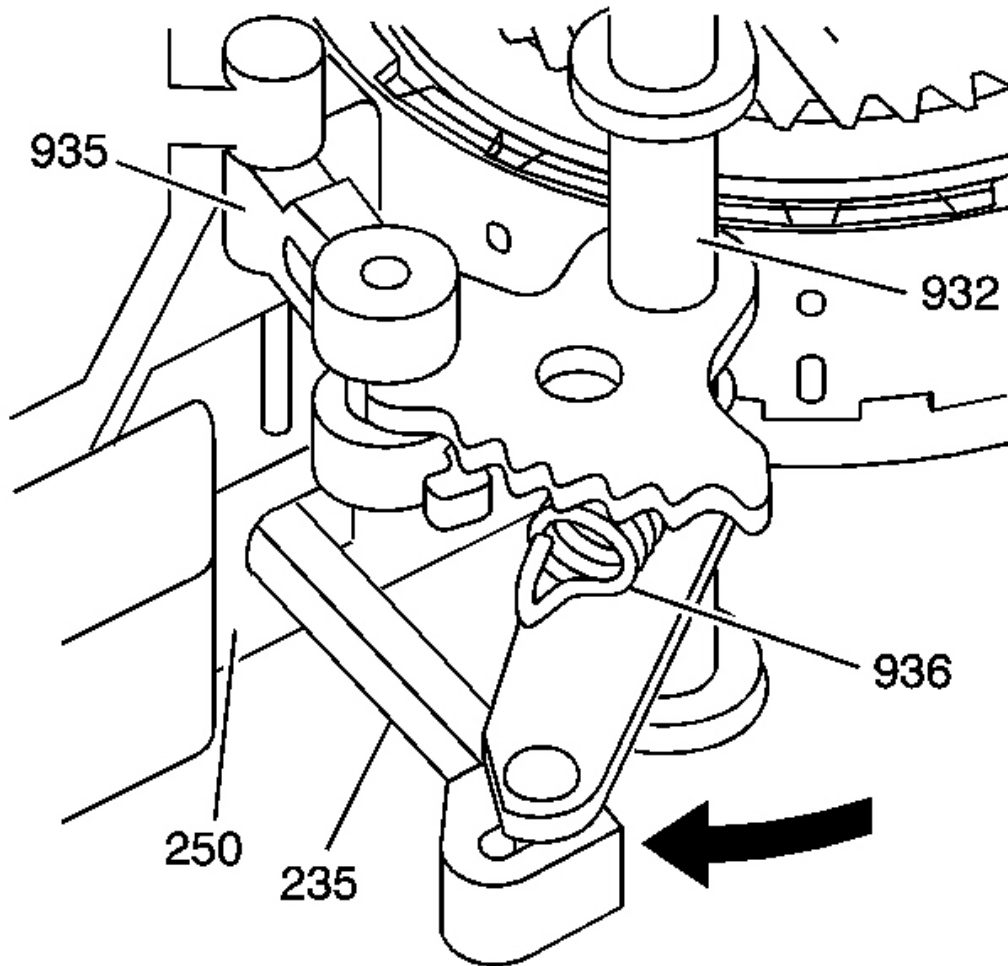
Manual Shift Shaft, Detent Roller Spring & Manual Valve
